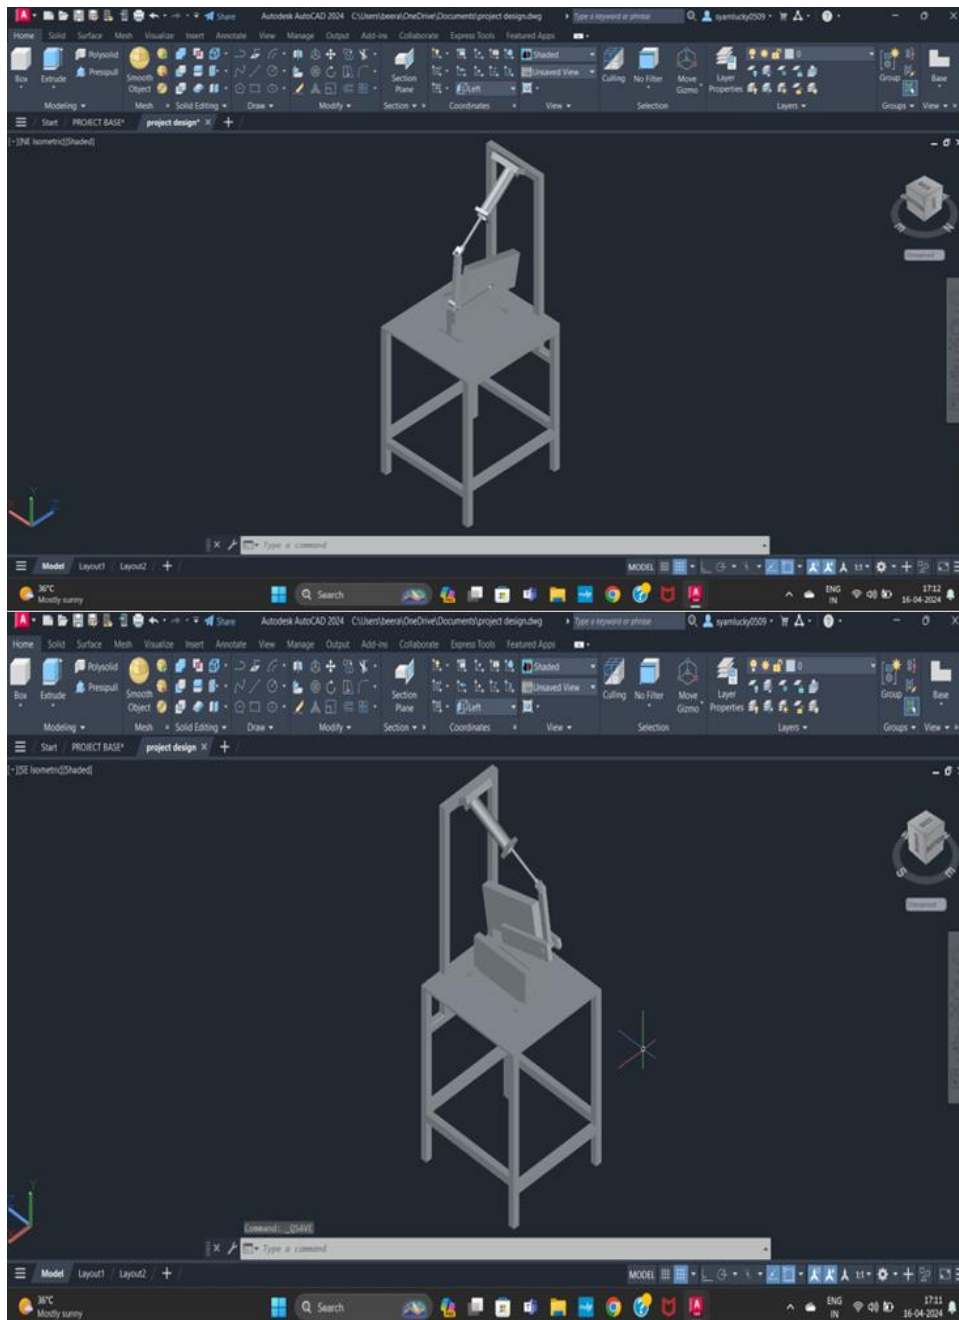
Auto cad design of pneumatically actuated sheet metal cutting machine.
